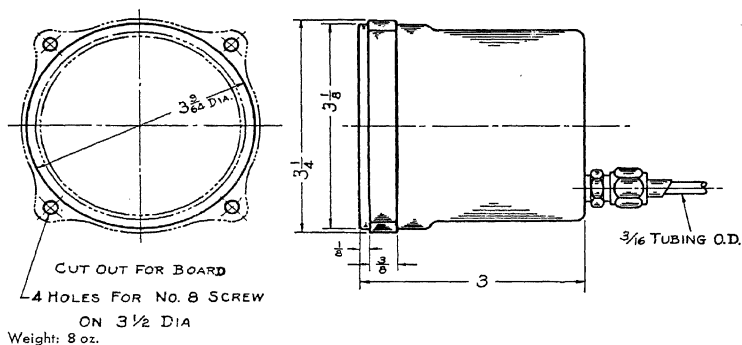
PIONEER MANIFOLD PRESSURE GAUGE
